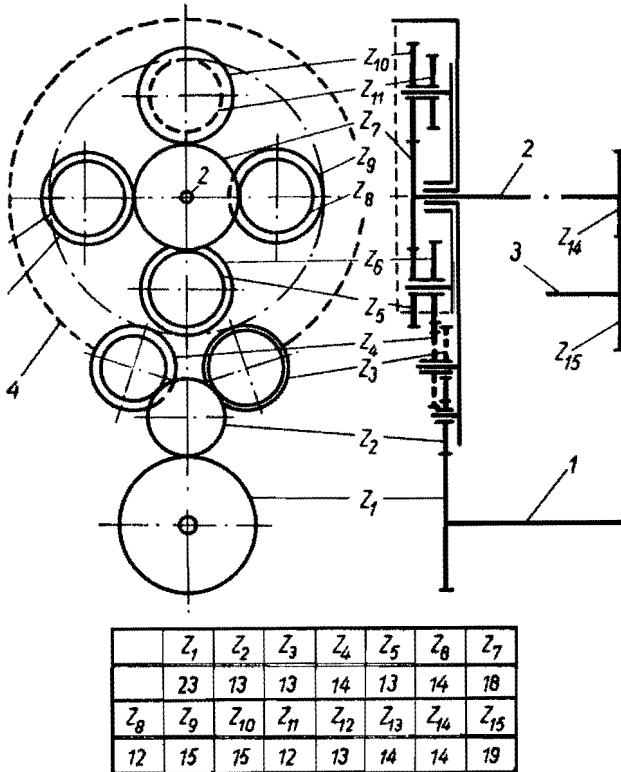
Example of a planetary gear transmission of the power drive of feeding units: 1—ground wheel axle; 2—countershaft; 3—shaft for feeding units; 4—ring for changing engagement of driving wheels (z_3) with planet wheels.
